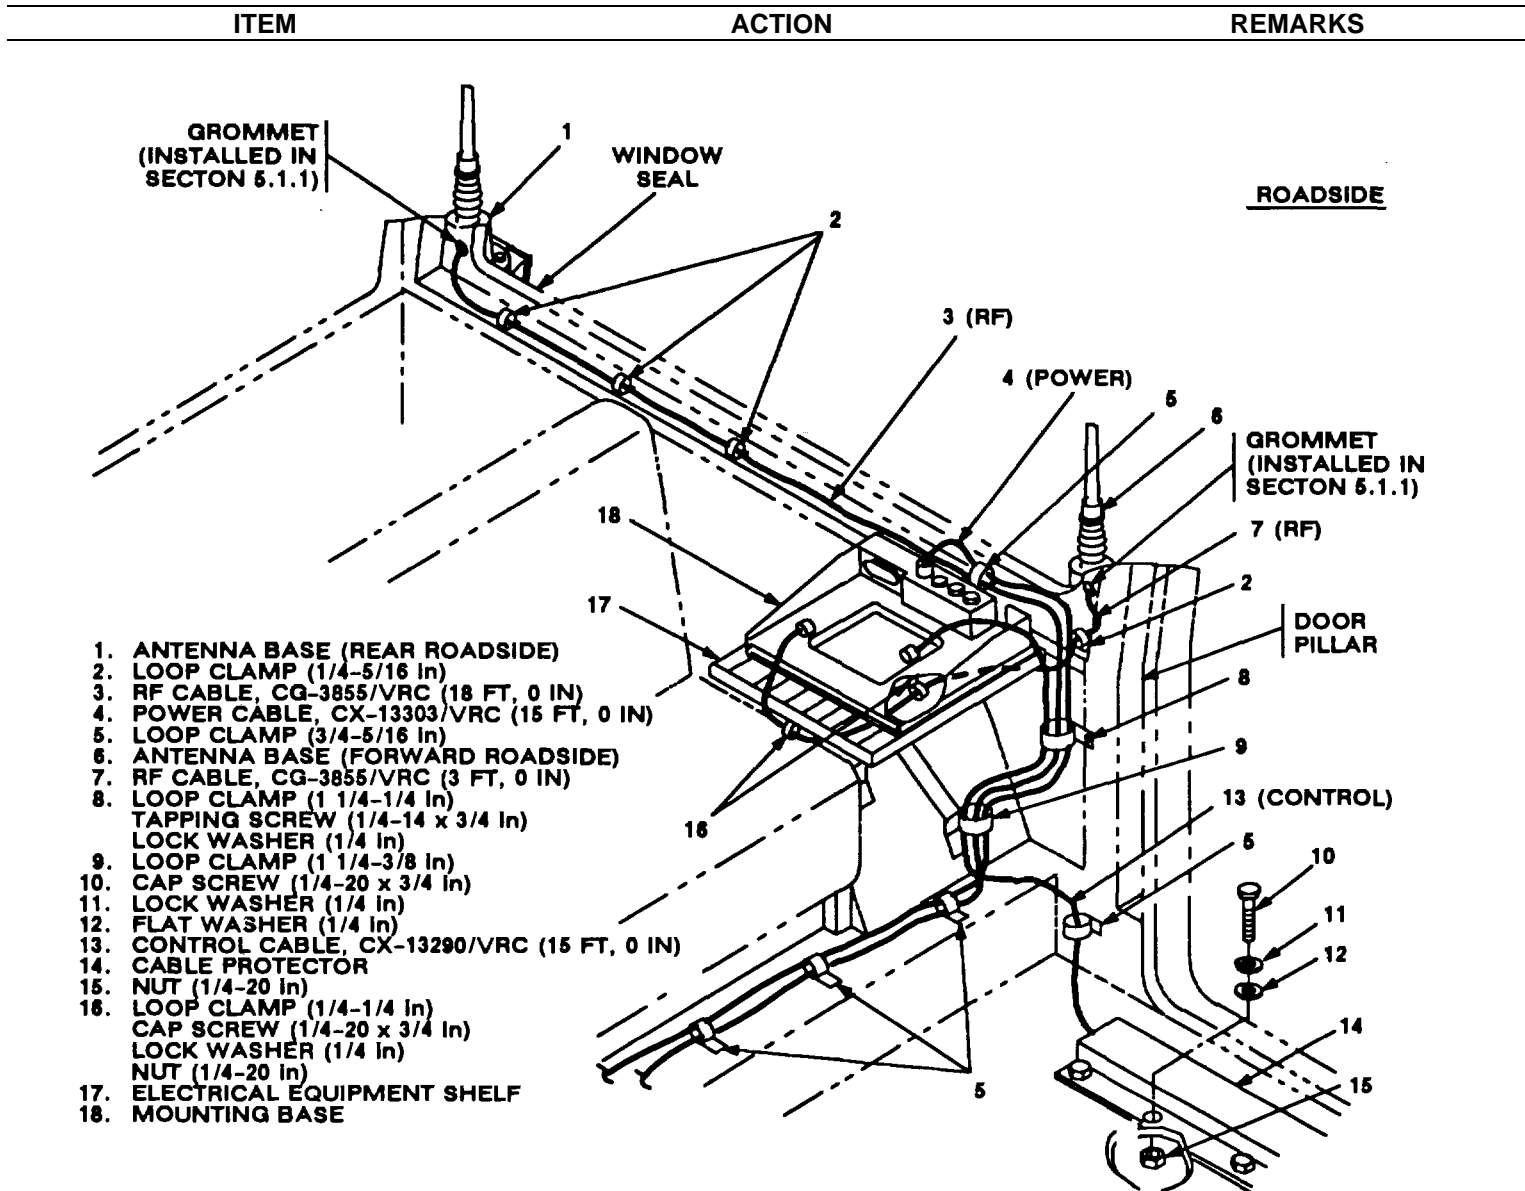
(2). Cable Installation: Rear Roadside Passenger Area
